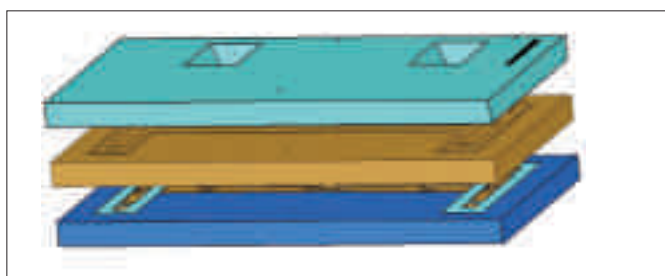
Microvalve sketch showing the three layers of the valve stack. Cover plate, mechanical layer and port plate.
